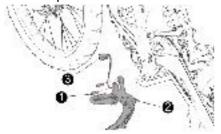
11.6 Disassemble left pedal assembly (see Fig 35)
